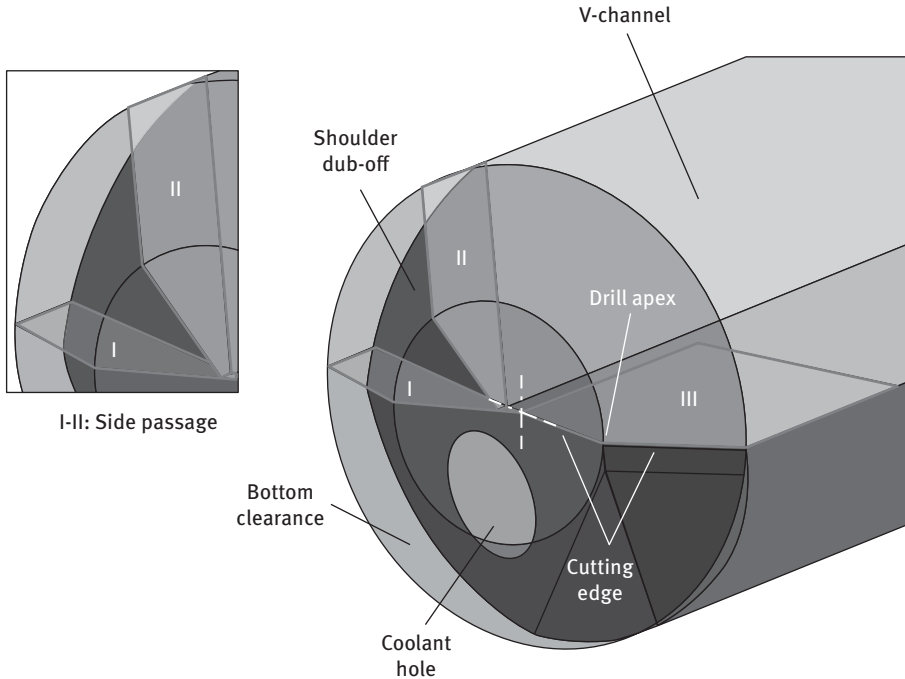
Coolant transport passage of a gun drilling process comprises bottom clearance, shoulder deb-off and V-channel for high-pressure coolant supply. I, II and III denote bottom clearance outlet, shoulder deb-off outlet and drill rake face, respectively. The side passage connects between the bottom clearance outlet I and shoulder deb-off outer II [27].
